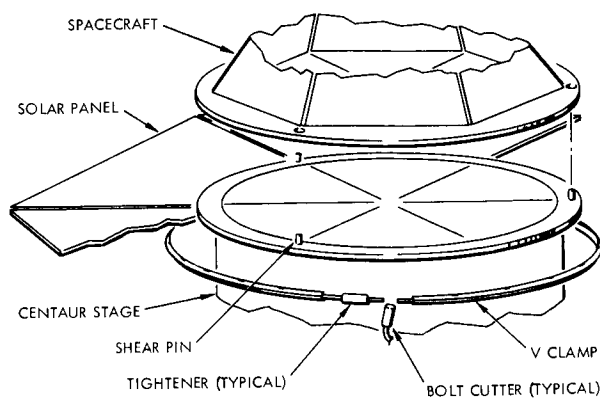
Separation Joint Assembly Showing V-Clamp Connection
